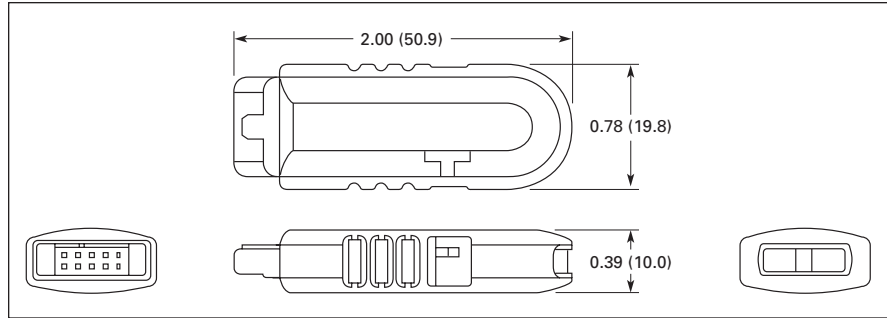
ELC — GPXFERMOD — Approximate Dimensions in Inches (mm)
